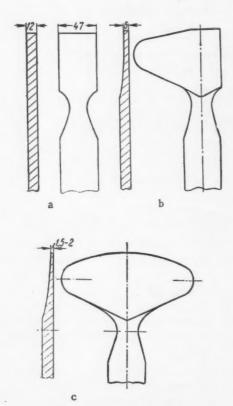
Change in the shape of the workpieces on rolling: a) Workpiece; b) after first pass; c) after second pass.
